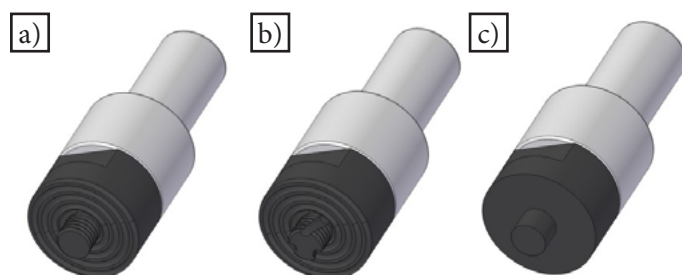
Working tools used in the friction stir welding process; a) tool N1, b) tool N2 and c) tool N3 [9]
